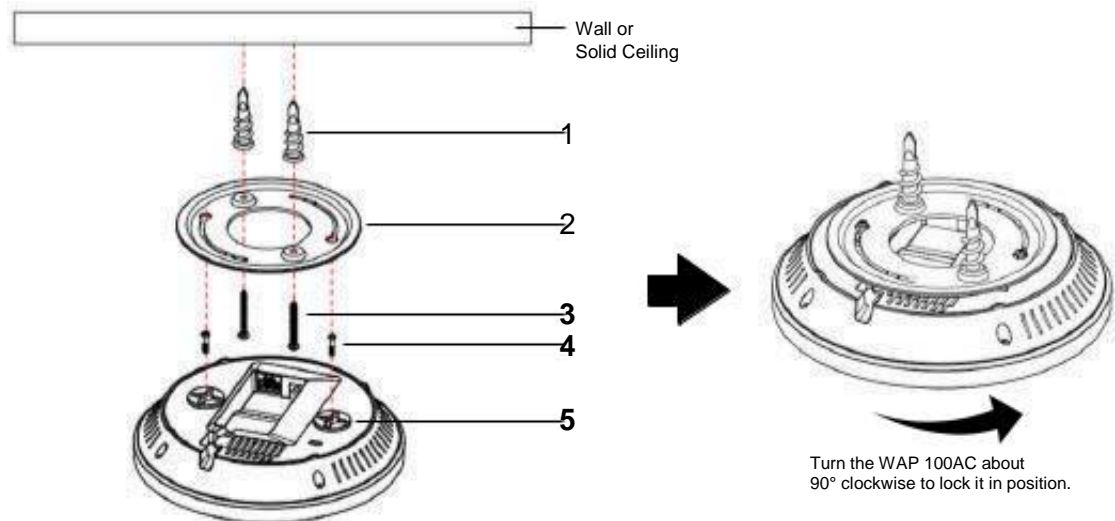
Mounting the WAP 100AC to a Solid Ceiling or Wall
